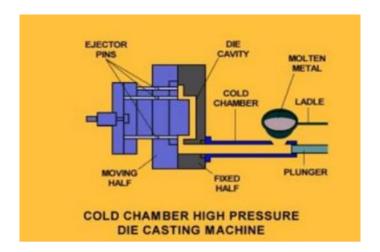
Cold chamber die casting machine components. (http24)
